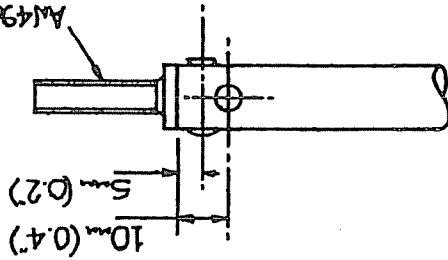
Rivet hole positions in 1/2" dia push-rod.
